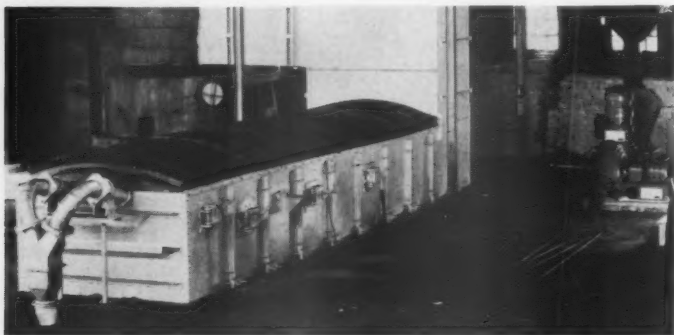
AIR FURNACE (15-TON) WITH PULVERIZER AND POWDERED COAL FEED CONNECTION, USED IN MAKING CHILLED IRON ROLLS, HIGH TEST GRAY IRON AND BRONZE CASTINGS.
